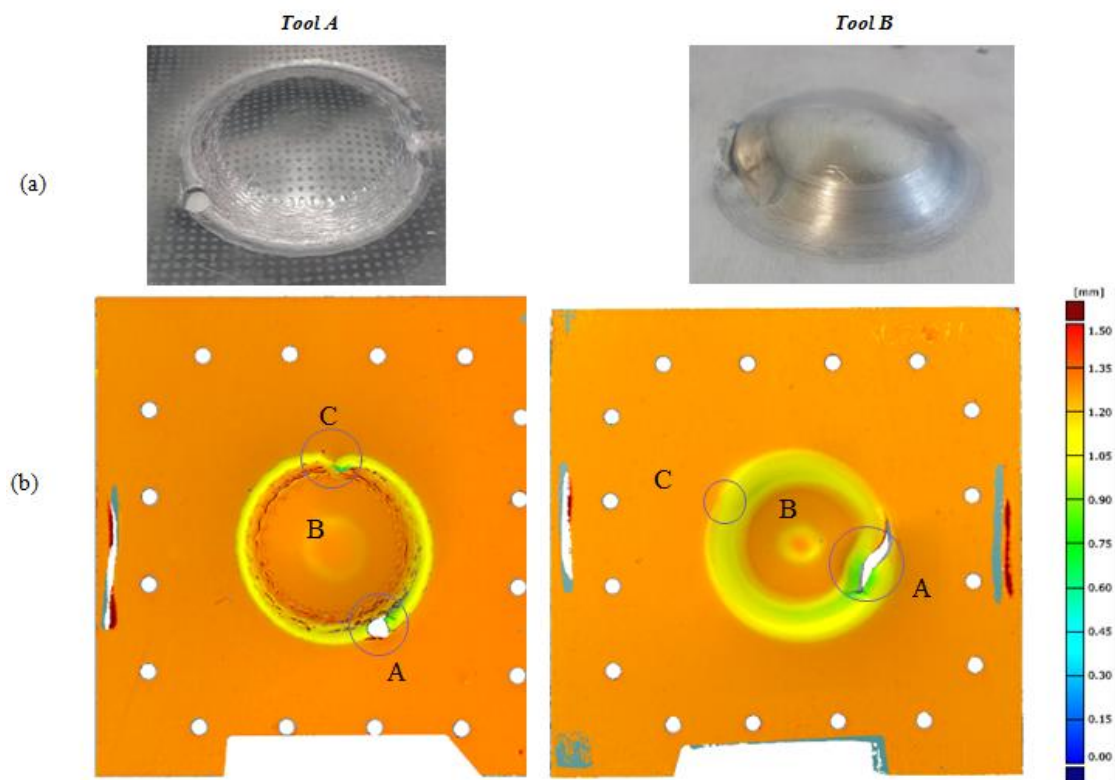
(a) Formed parts, (b) Thickness profile.
